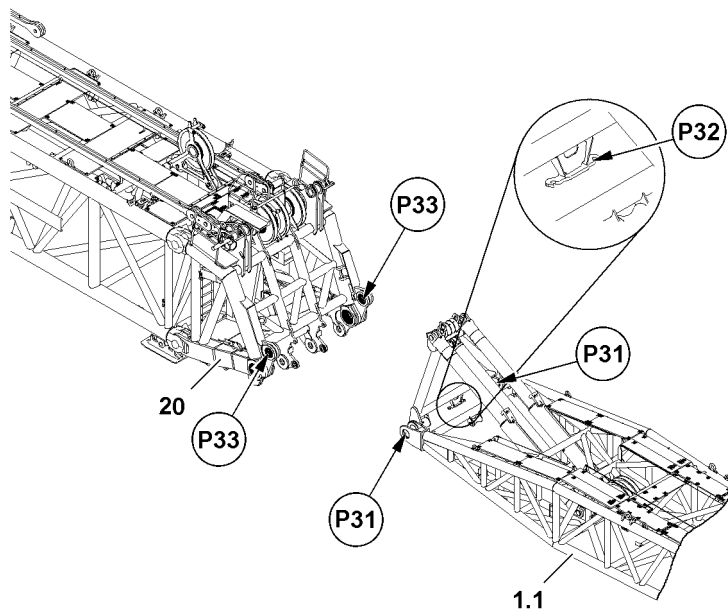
Assembling WA-frame 1 on the end section — Positioning WA-frame 1
